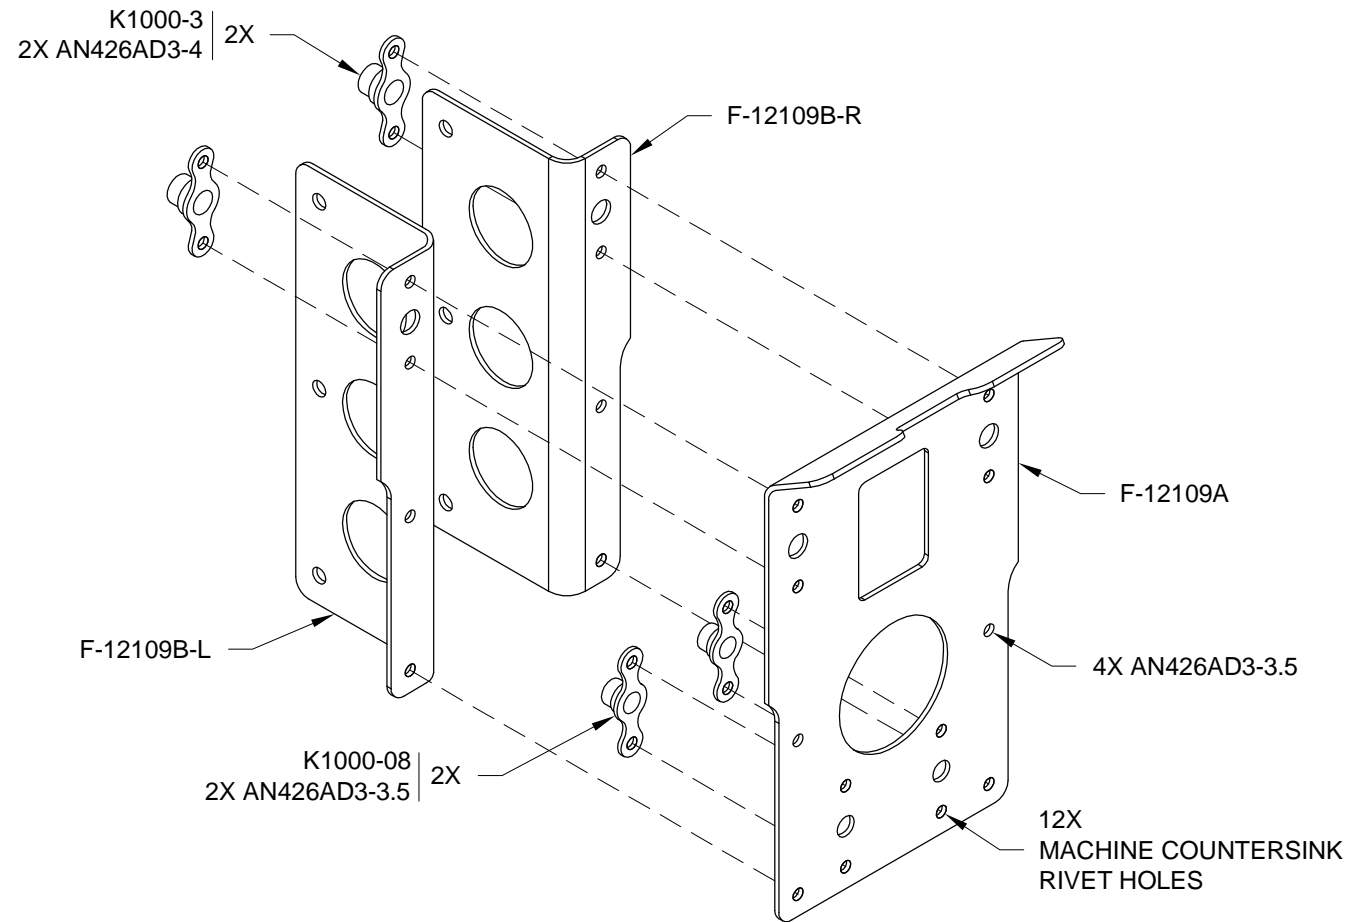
RIVETING THE F-12109 ASSEMBLY
